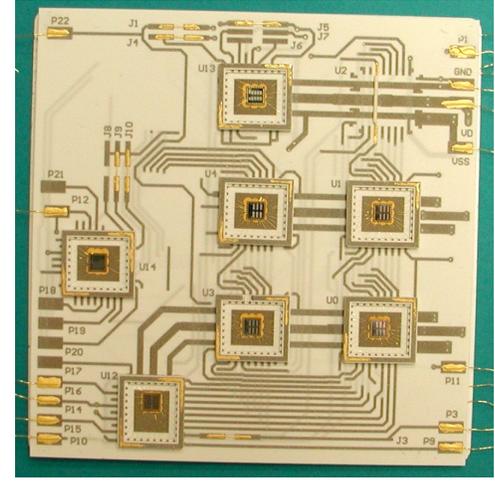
Photo of 11 cm x 11 cm prototype ceramic circuit board with packaged Gen. 11 SiC JFET-R chips (prior to attaching lids) in preparation for upcoming 460 °C Venus chamber testing.
